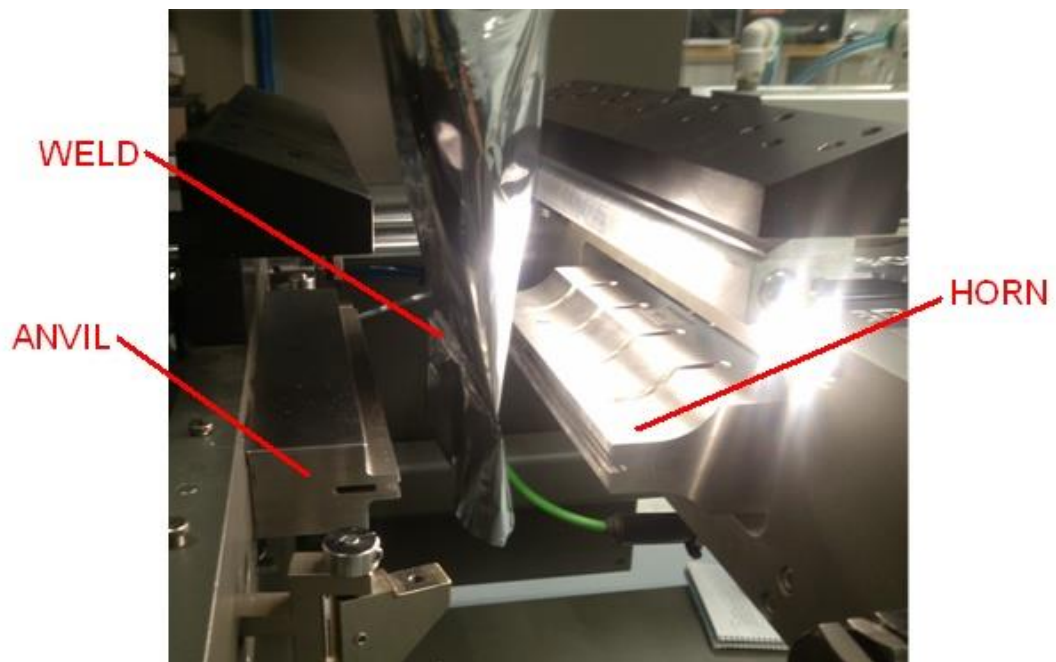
FFS machine equipped with ultrasonic horizontal sealer
